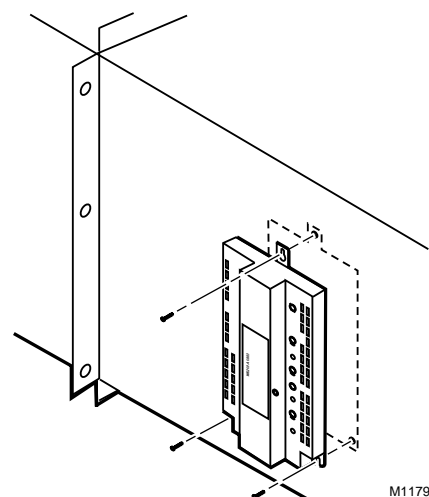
Mounting W6215, W7215, W7460 on sheet metal.
